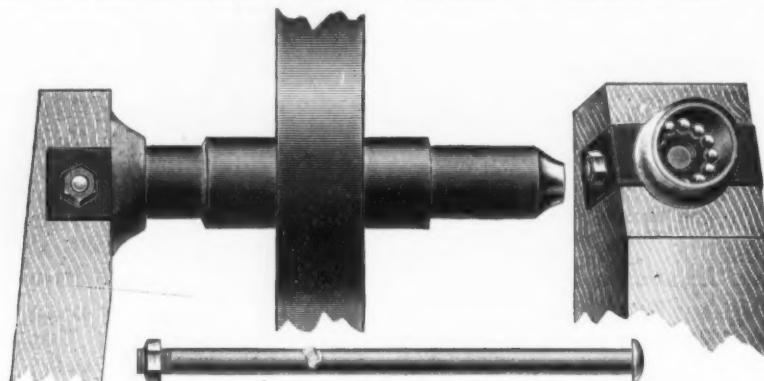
Baker's Wheelbarrow Ball Bearing.
